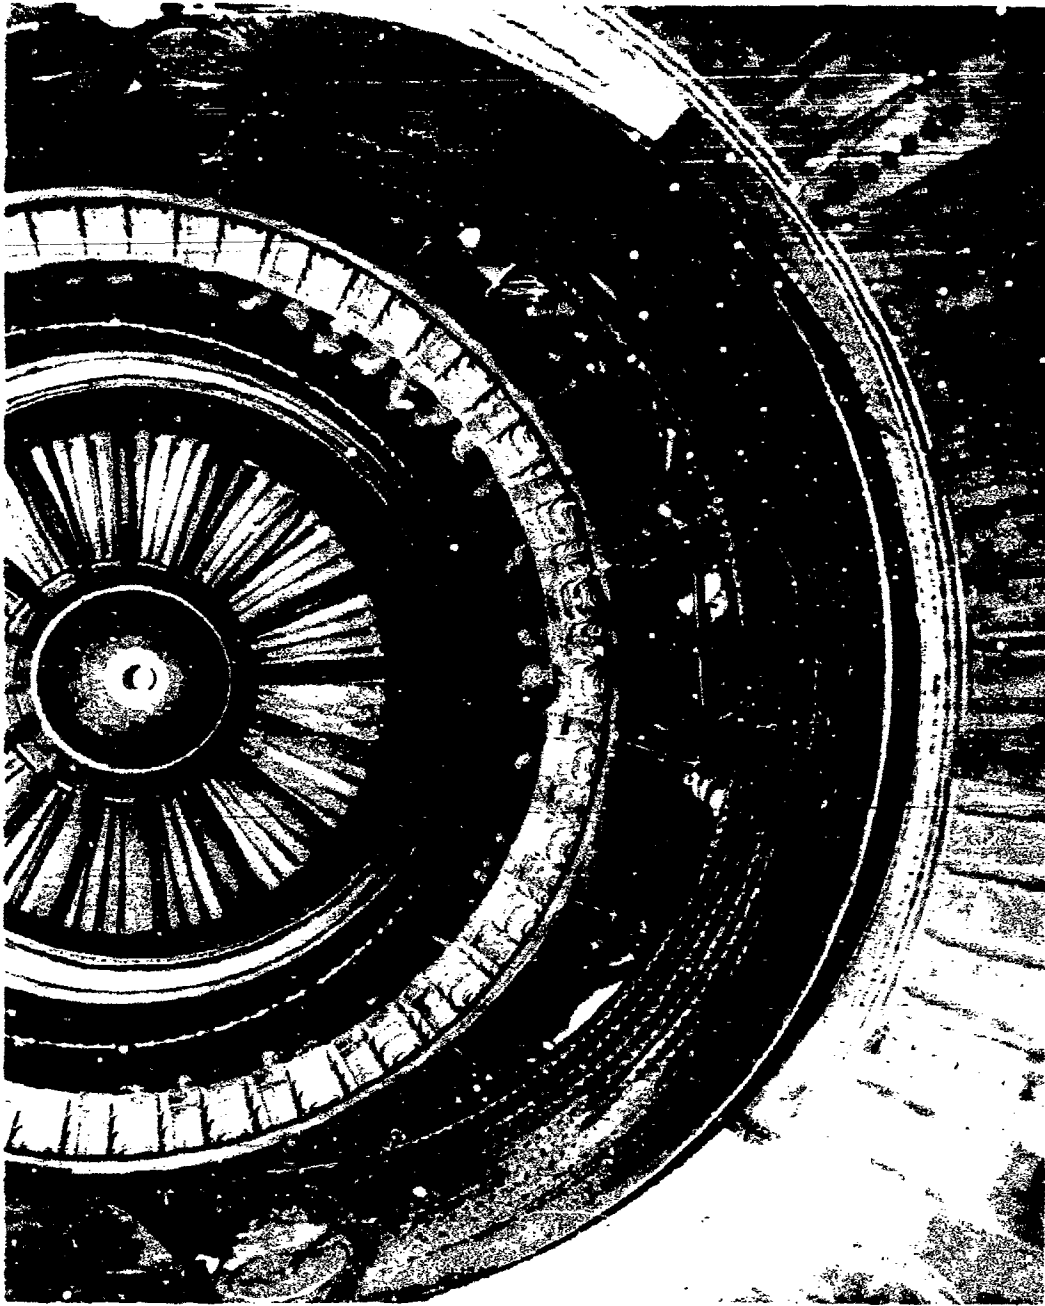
Engine FX-163-2B Reverser-Suppressor Lower Clamshell After Testing
